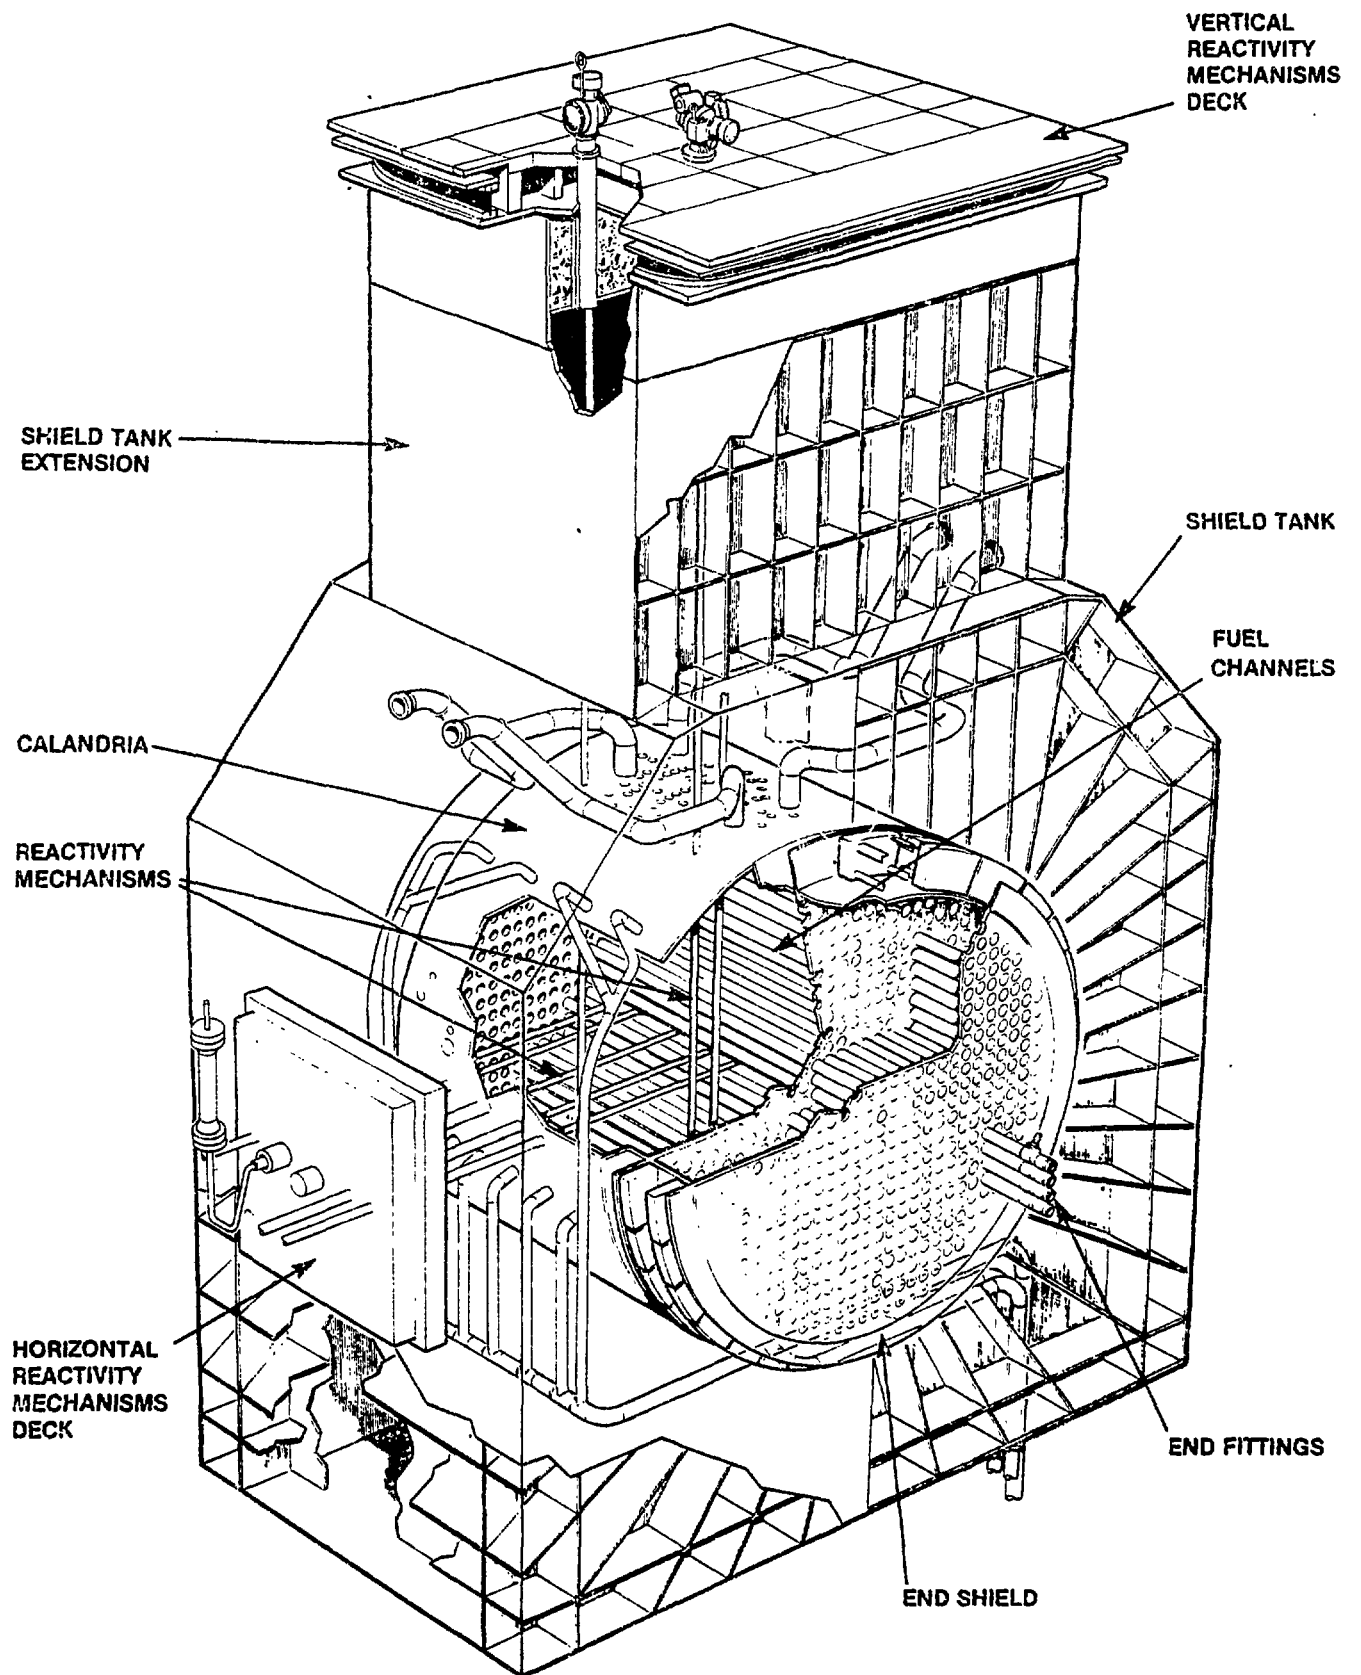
CALANDRIA AND SHIELD TANK ASSEMBLY
